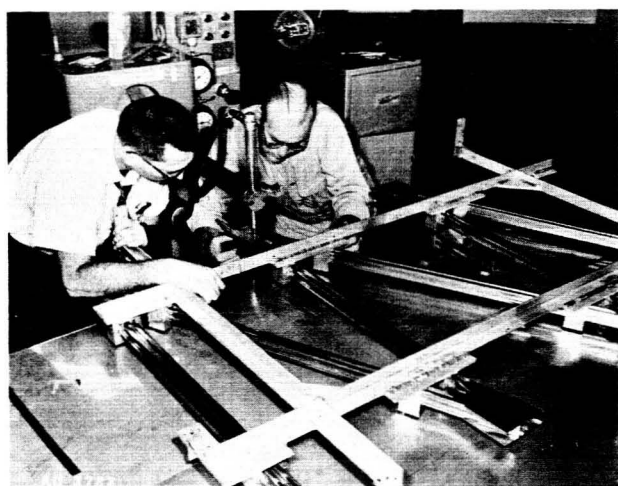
WELDING OF BEAM SUBASSEMBLY
